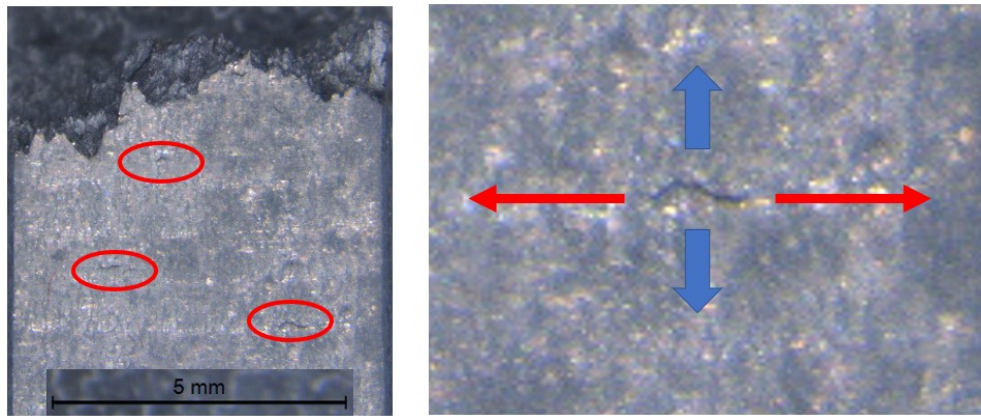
Optic images of the tensile traction fracture surfaces - Bottom side of the 550°C traction specimen
